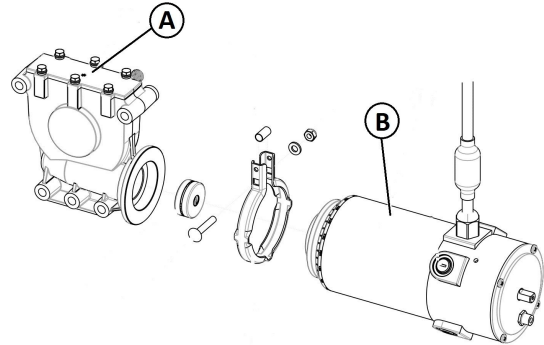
Example of a motor/gearbox unit with SSD motor
